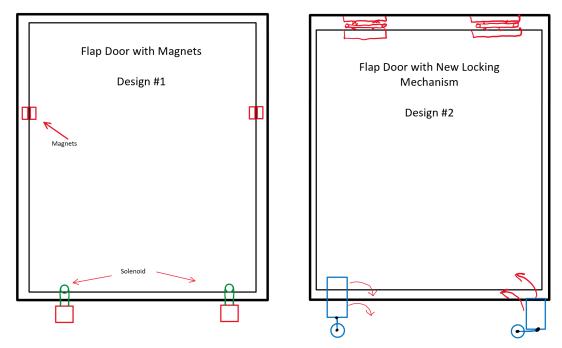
Sketch of the how the solenoid and rectangular locking mechanism would be implemented
